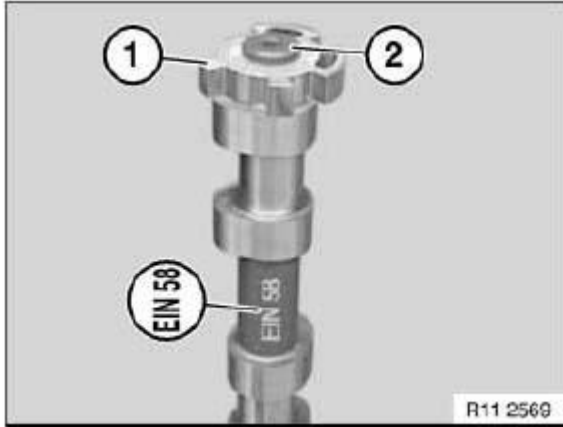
Aligning Sensor Gear With Camshaft Groove
